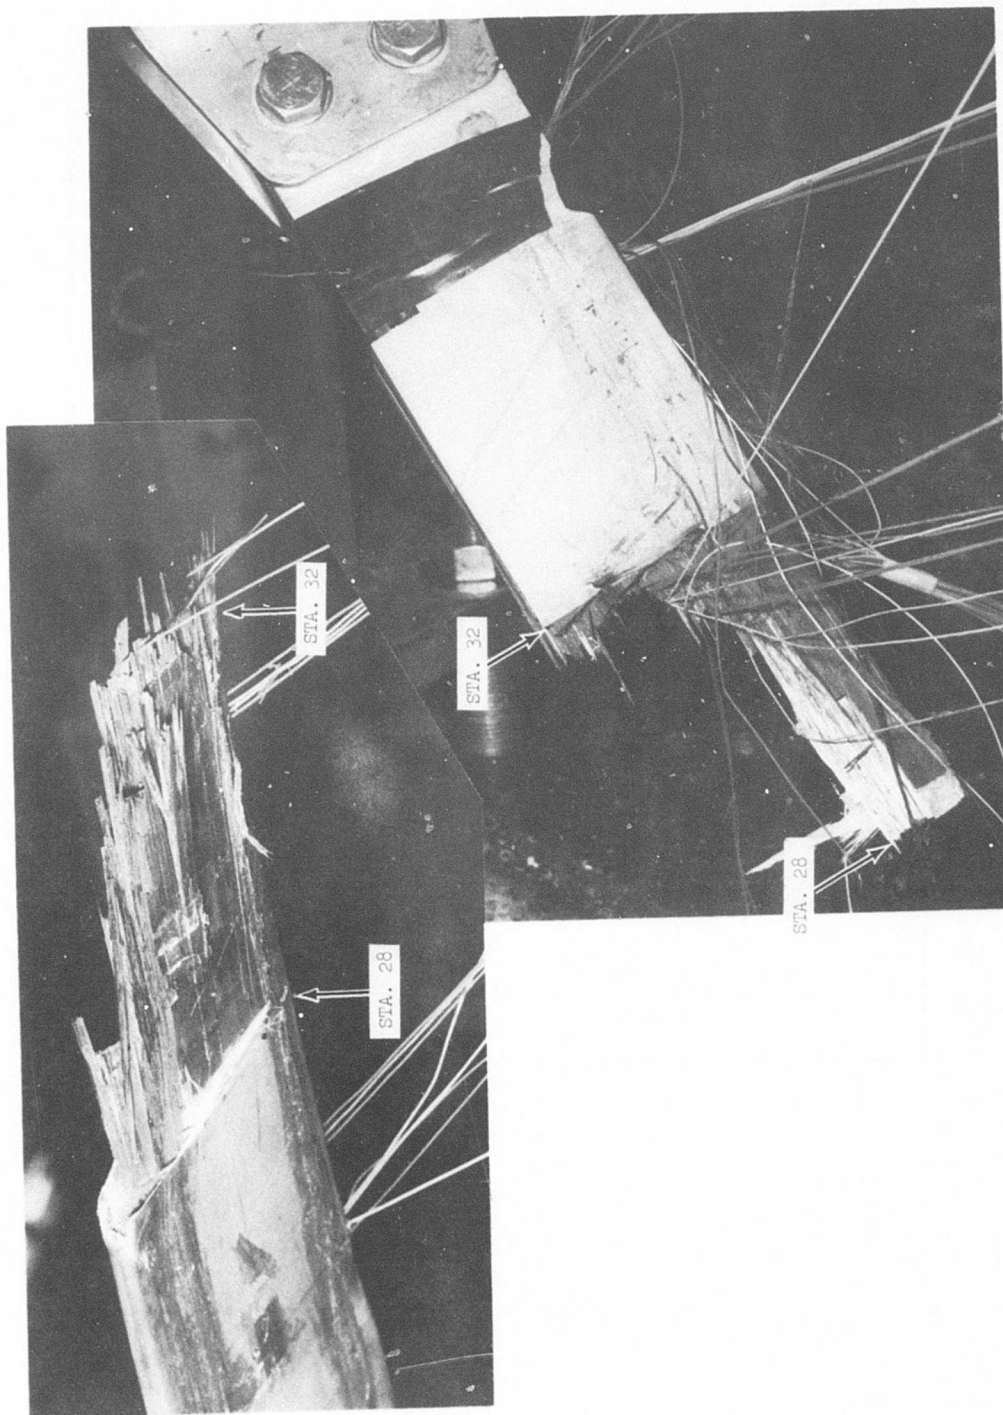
Closeup of Root End Static Test Specimen Fracture.
